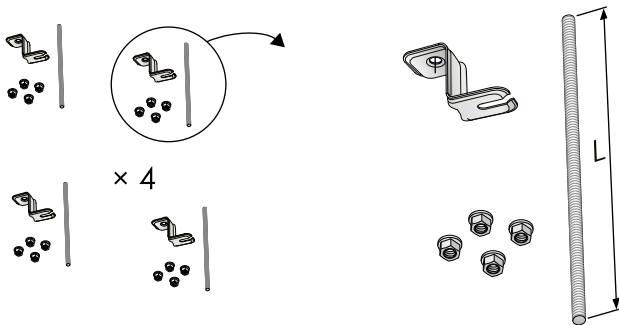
Assembly piece SYST MS M8-1, ceiling mount and threaded rod
